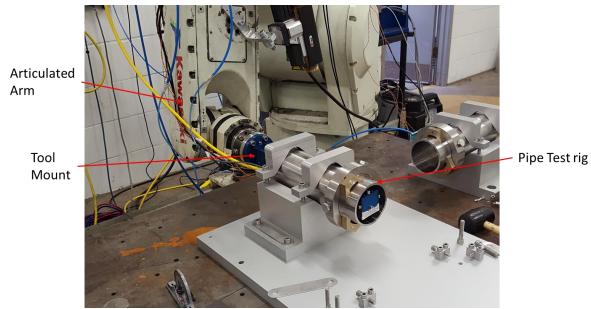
Miniaturised cutting and welding processing heads used in the high power laser trials.
